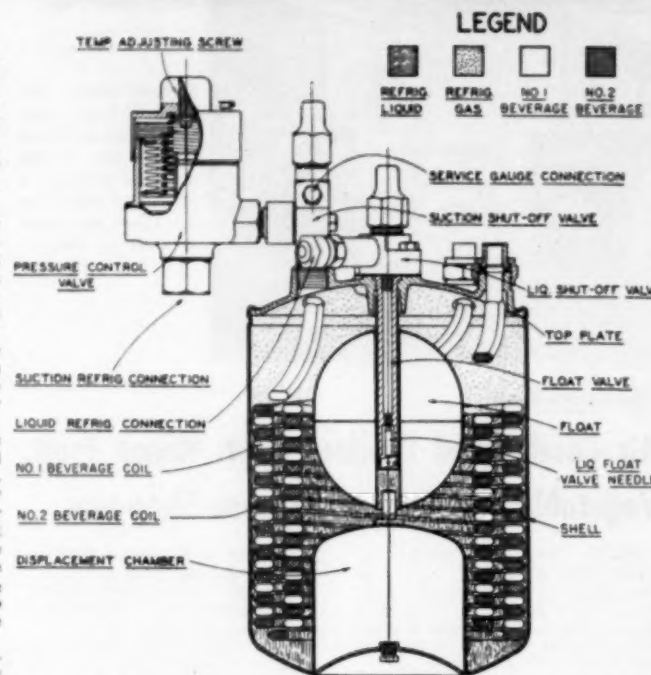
This cutaway view shows the construction and component parts of a Temprite "instantaneous" cooler.
